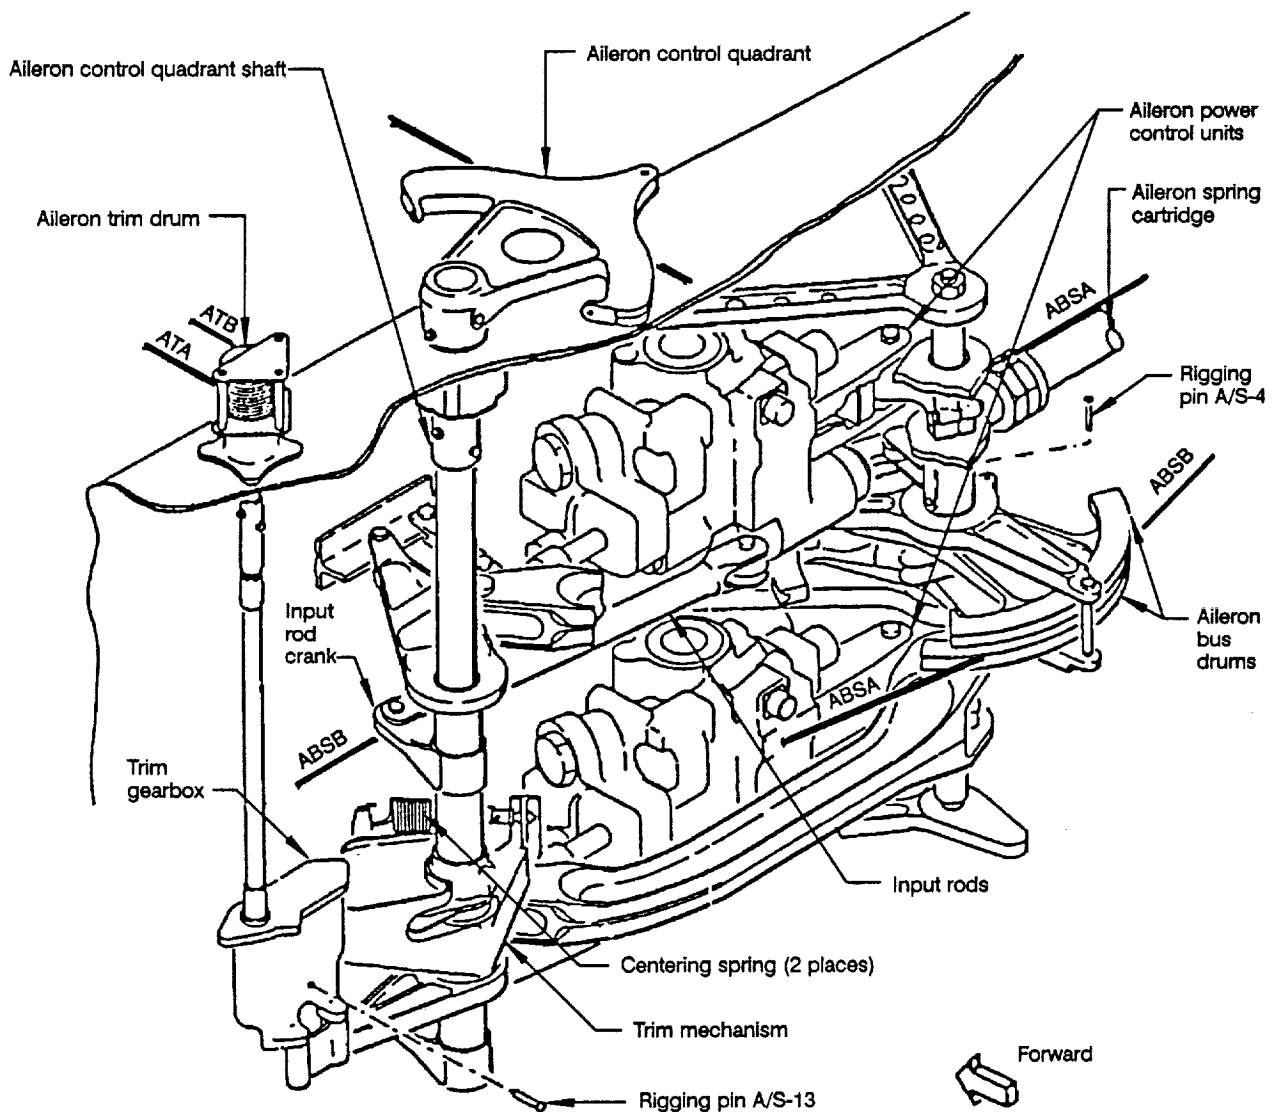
Component Locations Lateral (Aileron) Control and Trim System – Expanded View
